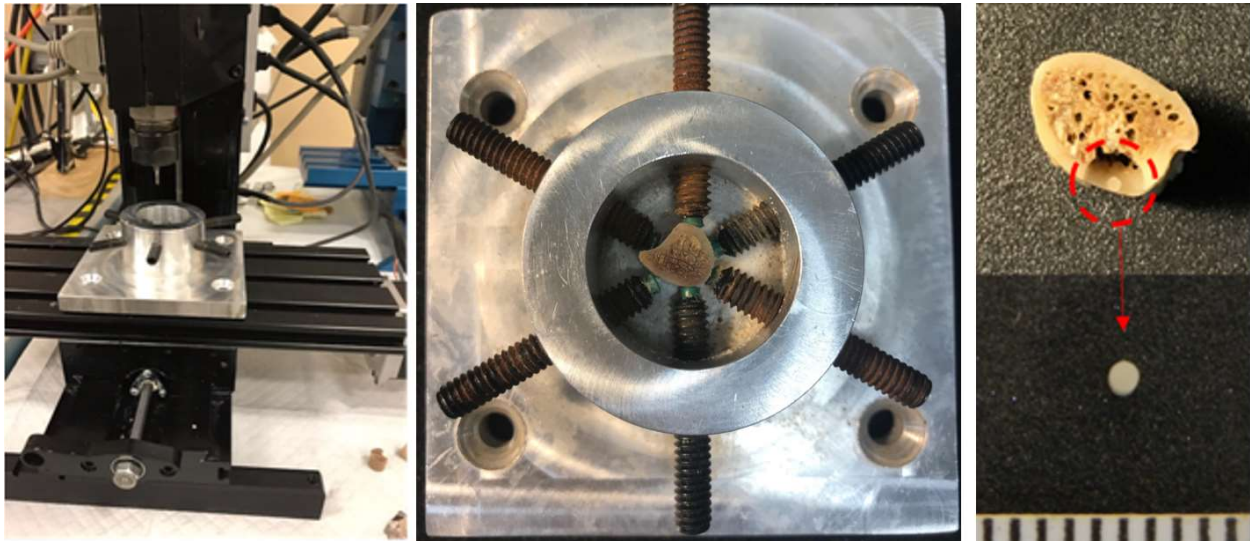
Cylindrical bone chuck mounted on CNC (left), rib section mounted in bone chuck (center), and cylindrical bone sample milled from pleural side of rib section (right).
